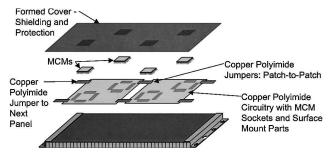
Exploded view of MFS panel construction that shows flexible circuitry, jumpers, MCMs, and MCM socket system.
